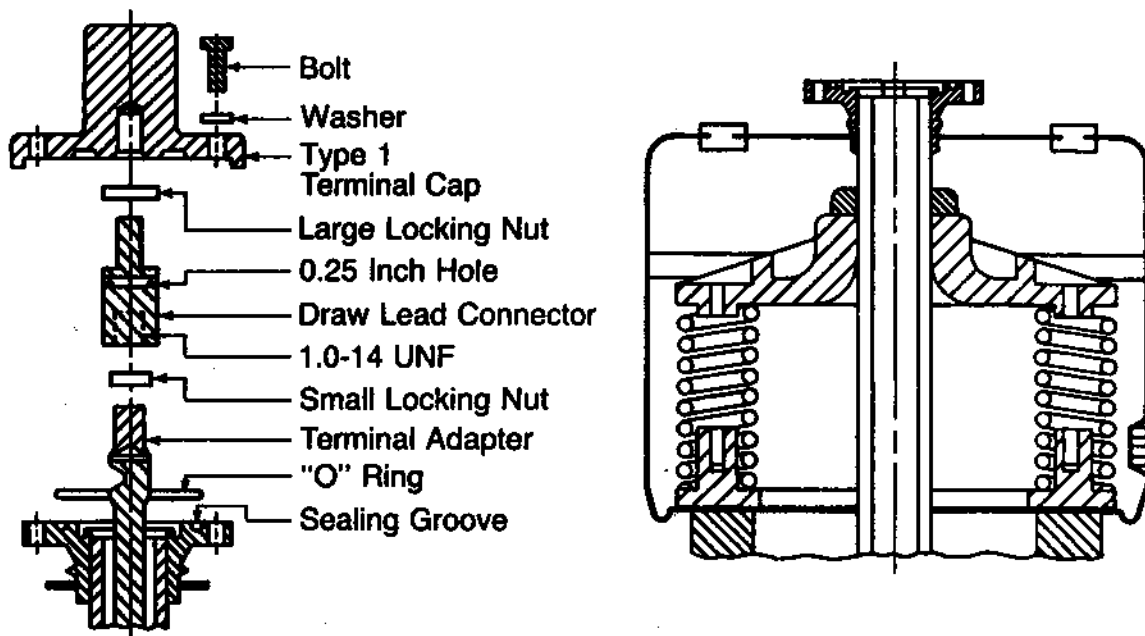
Top Terminal Cap for a Draw Lead Bushing
